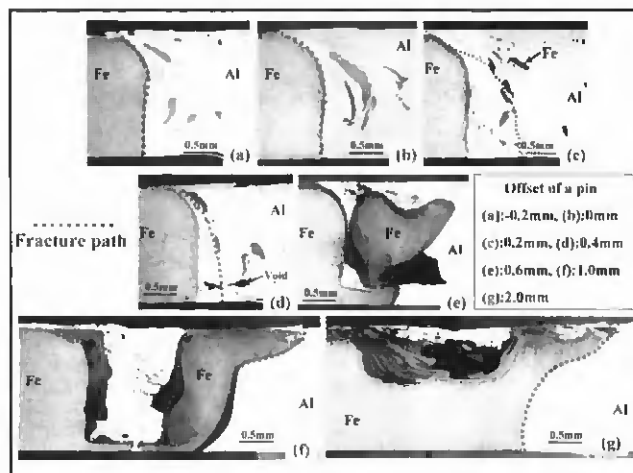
Effects of pin offset on the microstructures and fracture paths of welds.
